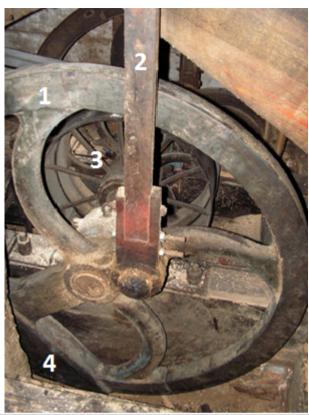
Drive of a vertical saw frame One of the crank wheels (1) with a connecting rod (2). Behind it are the loose and fixed belt pulleys (3). Bottom left of the crank wheel is the counterweight (4).
